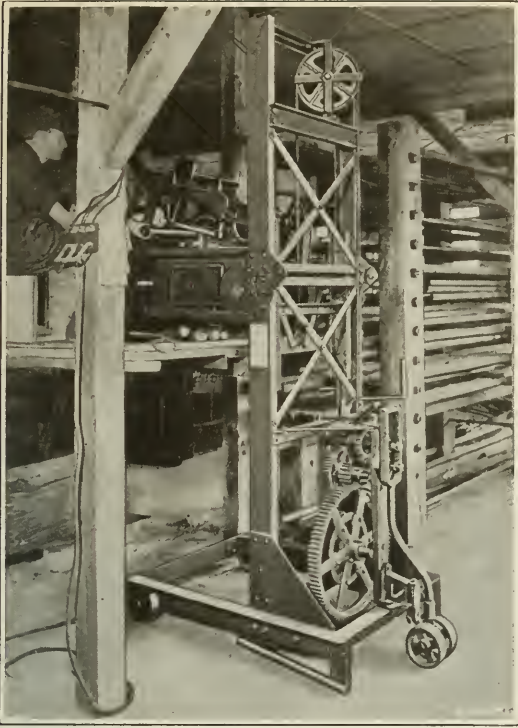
Not every manufacturer is enterprising enough to install an elevator at his steel stock rack. The Mechanical Appliance Co., Milwaukee, Wis., uses a portable tiering machine built by the Economy Engineering Co., Chicago, Ill., for lifting a hacksaw to the required level so that a bar of steel may be drawn out on the rack and cut off. While this may seem a somewhat complicated arrangement for handling a simple shop operation, it saves time and avoids confusion.
